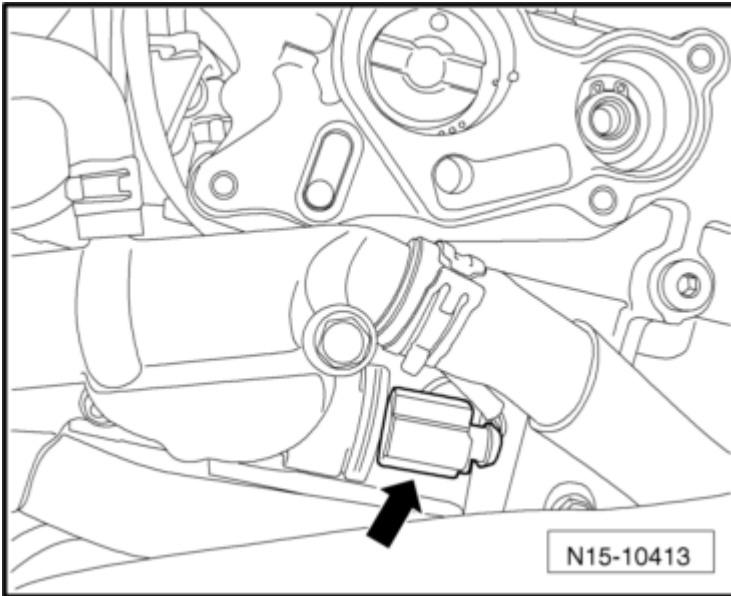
Identifying Connector -Arrow- To Engine Coolant Temperature Sensor
